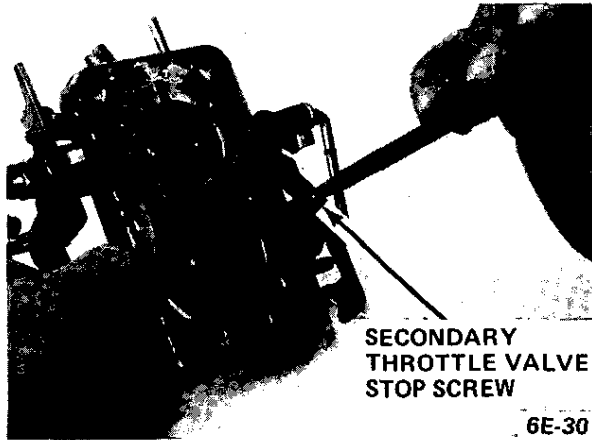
E-30 Adjusting Secondary Throttle Valve Gap
